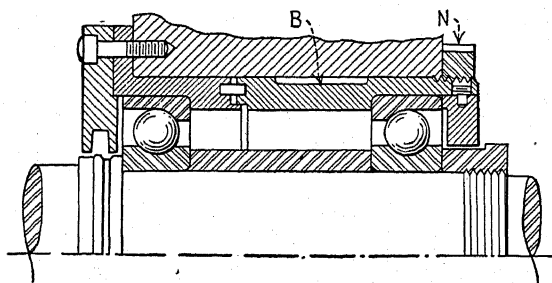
Bearings with provision for preloading. (*Courtesy New Departure Manufacturing Company.*)
